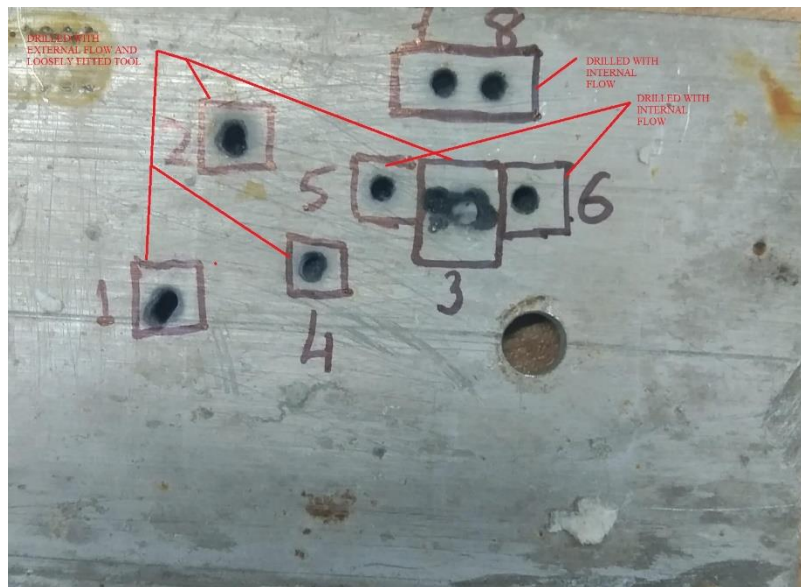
ALUMINUM PLATE WITH DRILLED HOLES
